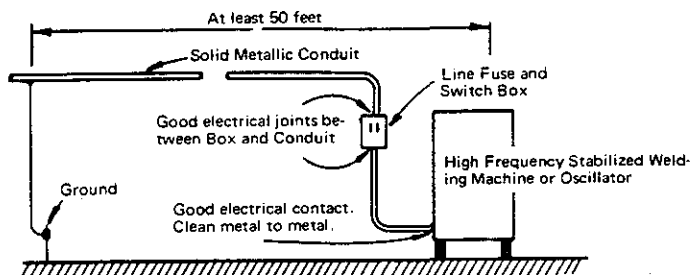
Power Service Installation H.F. Stabilized Arc Welding Machine
